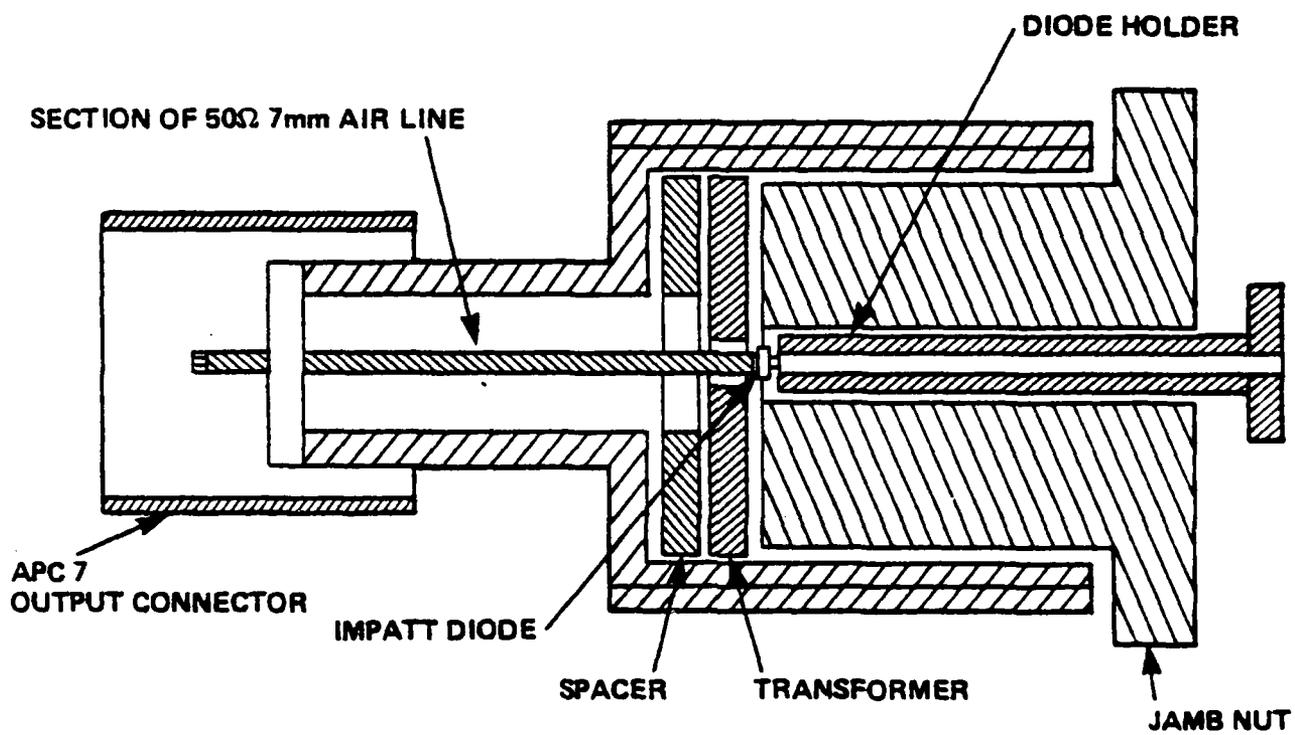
COAXIAL CAVITY IMPATT TEST FIXTURE.
